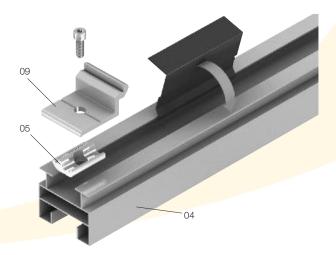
Installing the Anchor Blocks for the Fixing Brackets
